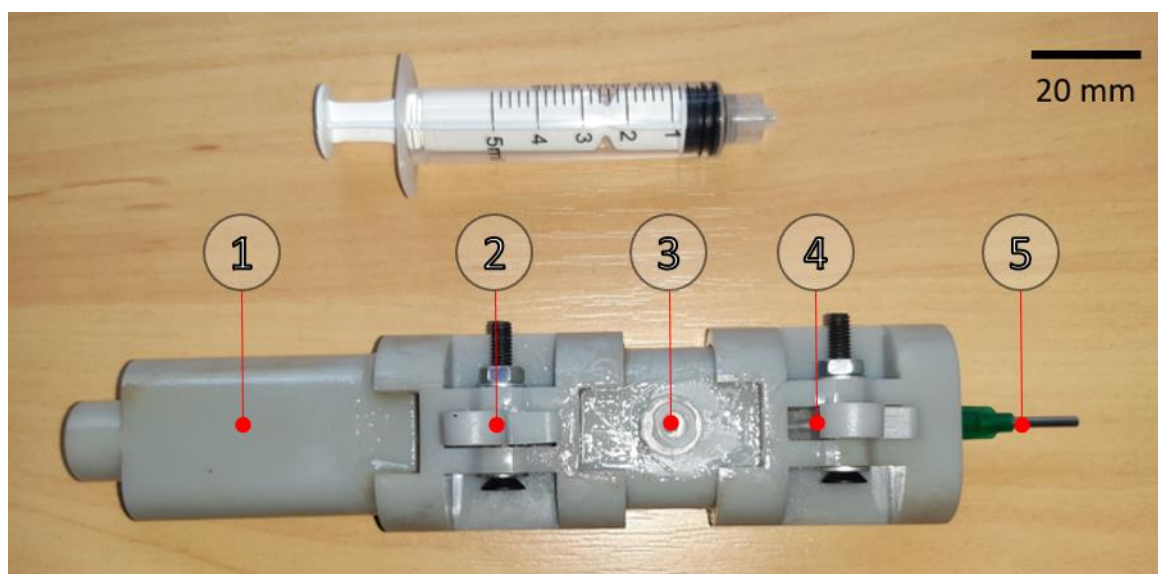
Sample Collection Device fabricated using SLA printing (1st iteration)
